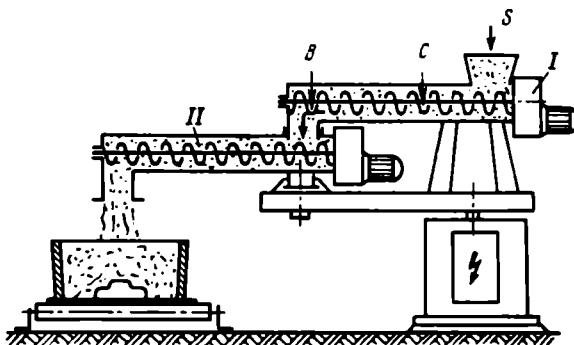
Schematic of a screw-type sand mixer for preparing cold-curing mixtures
